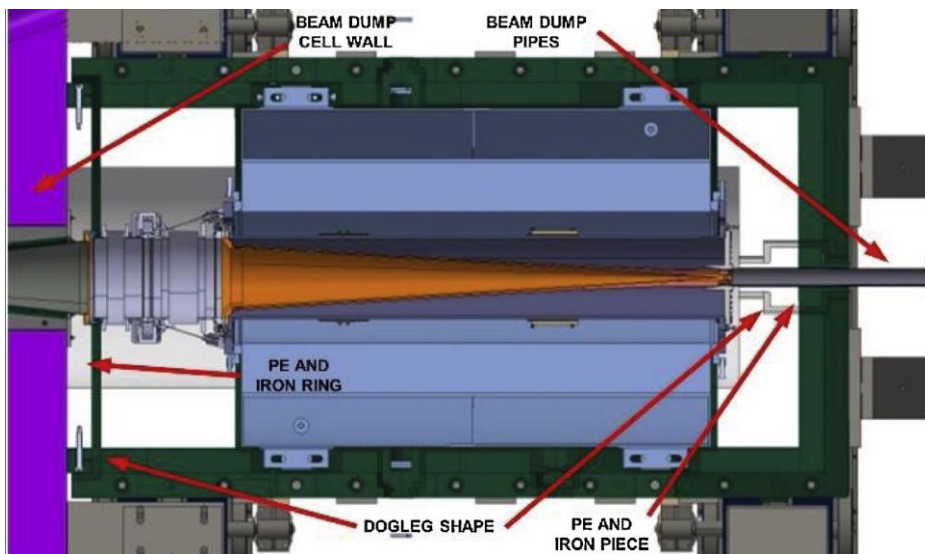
Dogleg shapes in the beam dump cell wall and in the passage of beam dump cartridge pipes.
